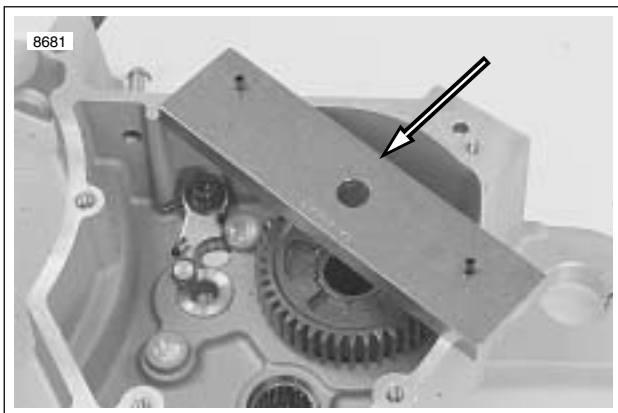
Bearing Remover Cross Plate Mounting (Part No. B-45847)
